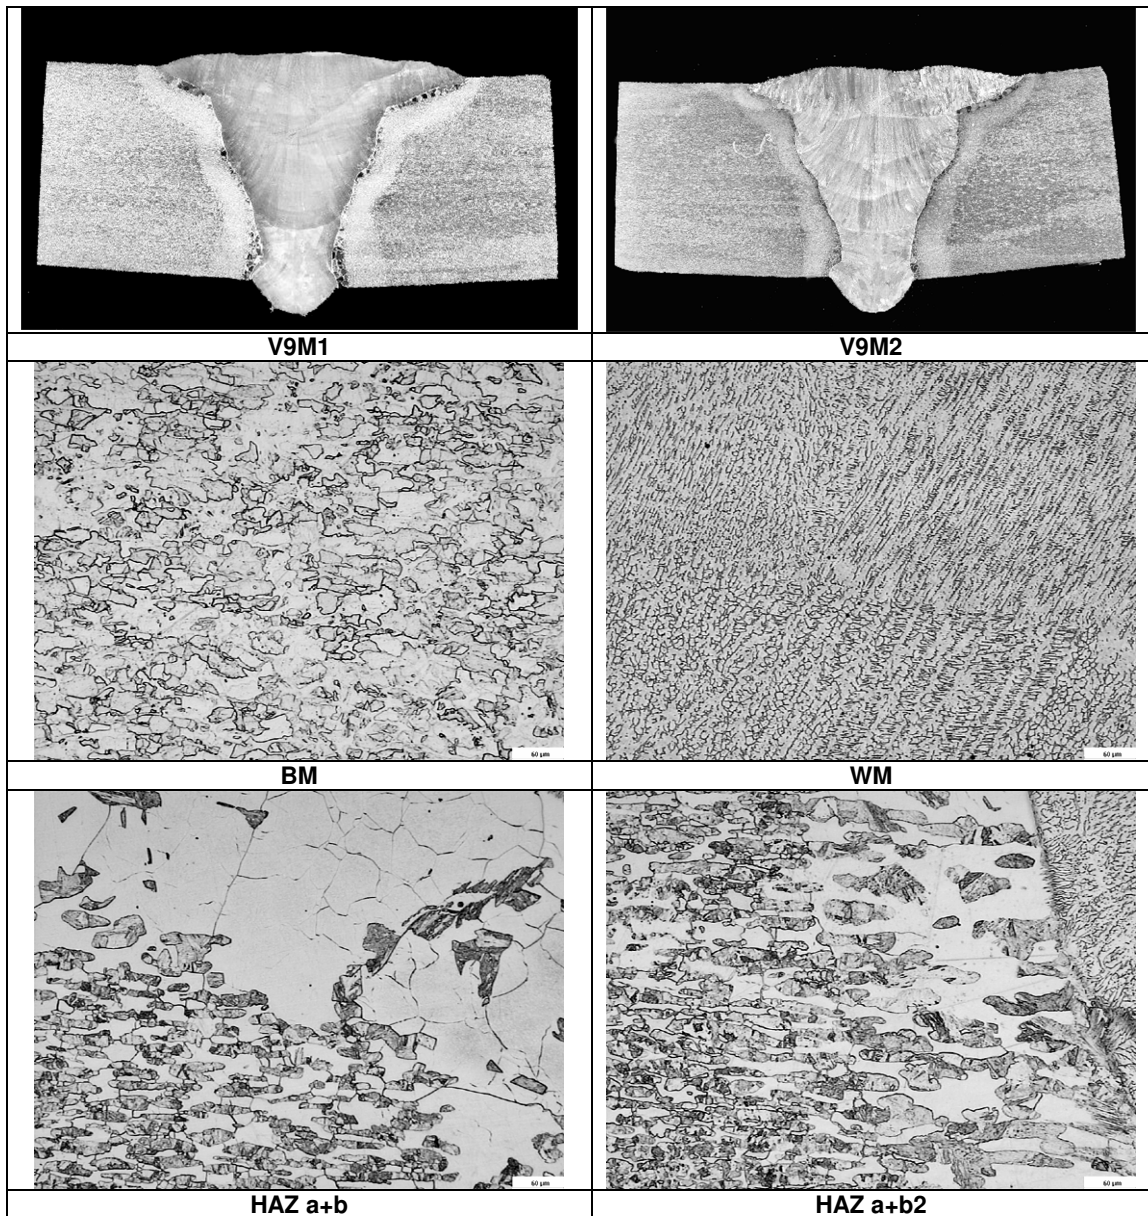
Macro and micrographs of 12 mm thick SMAW weld with 309 filler (V9).
